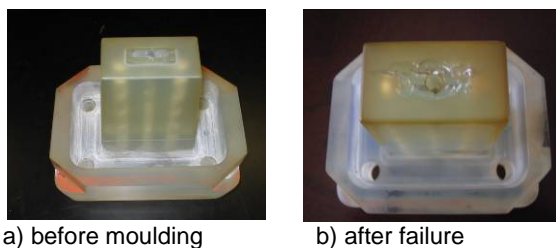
Feeding system of the Somos 11120 resin core moulding blocks a) before injection b) after injection
